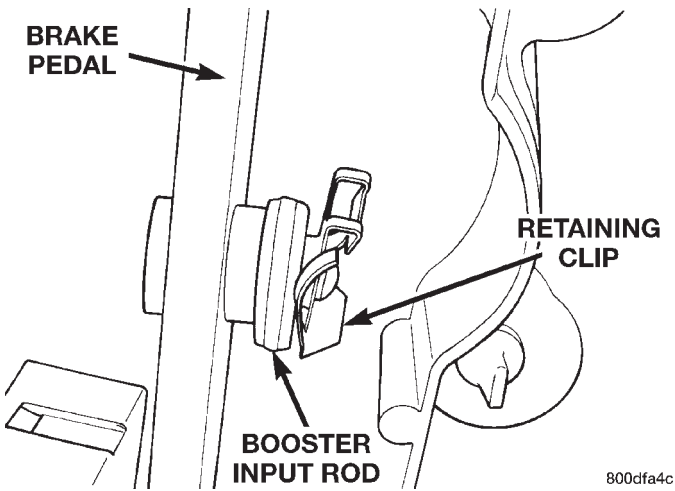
Retaining Clip Installed On Brake Pedal Pin
